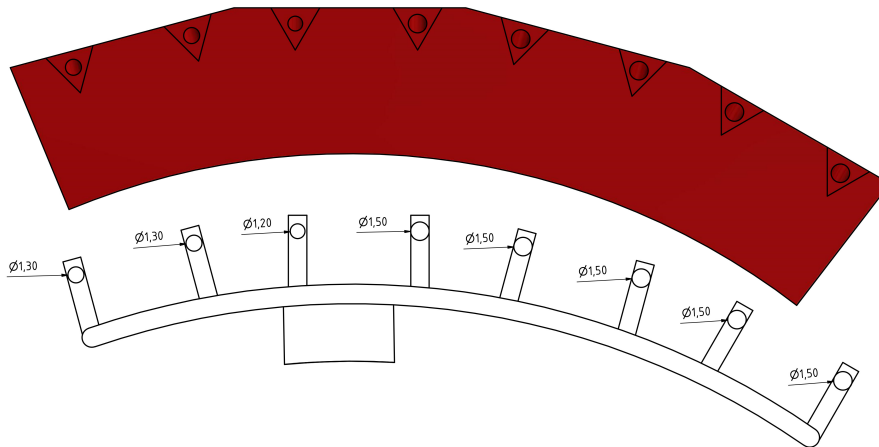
Technical sketch of the optimized endpiece. The original design used eight drill holes with 1.5 mm diameter.
